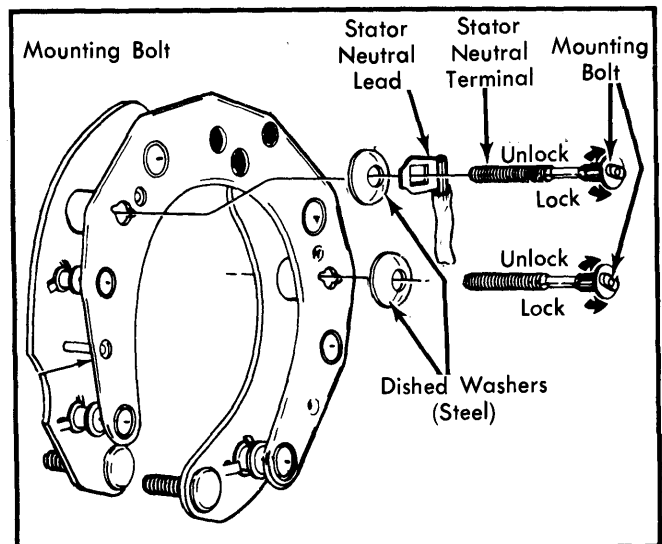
Stacked Type Rectifier Assembly (With Exposed Diodes)
